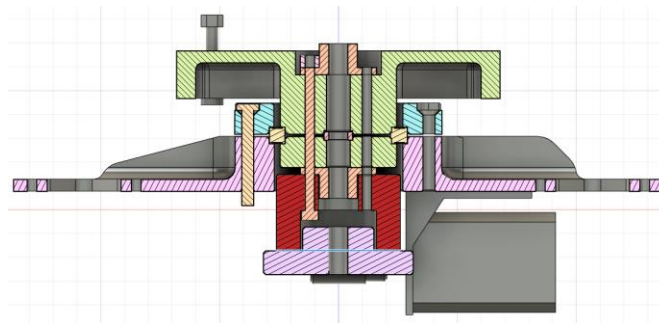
Cross-sectional View of Horizontal Rotation Mechanism with Connection Part
